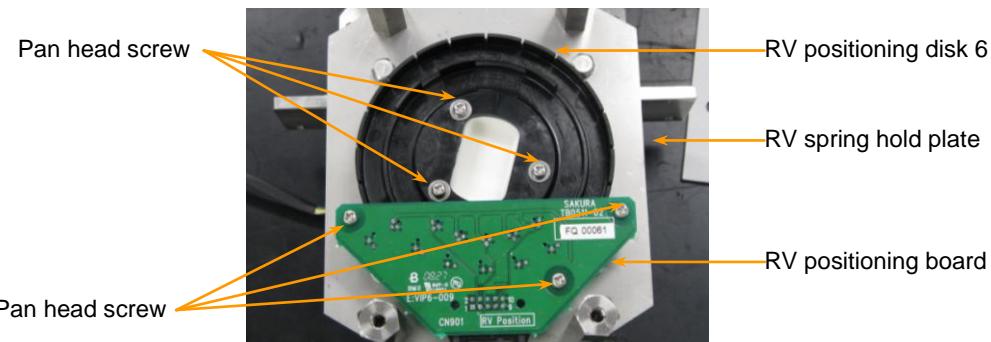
Removal of RV positioning board and positioning disk
